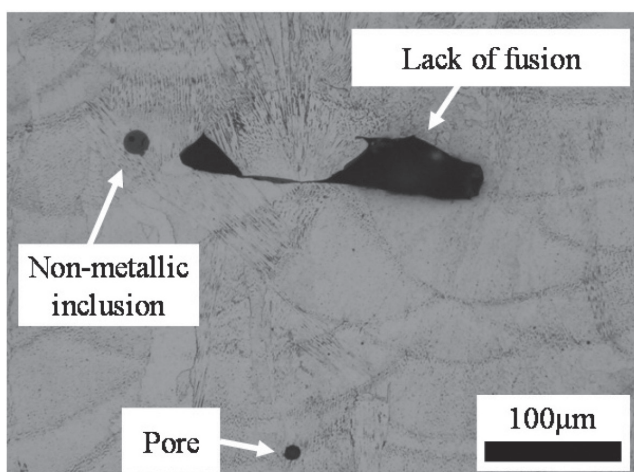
Defects in ALLOY 718 parts manufactured by SLM.
